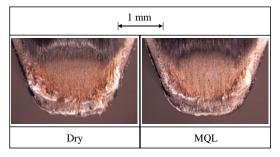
Conditions of rake face (uncoated tool, cutting speed of 117 m/min, cutting a groove of 0.5 m)
